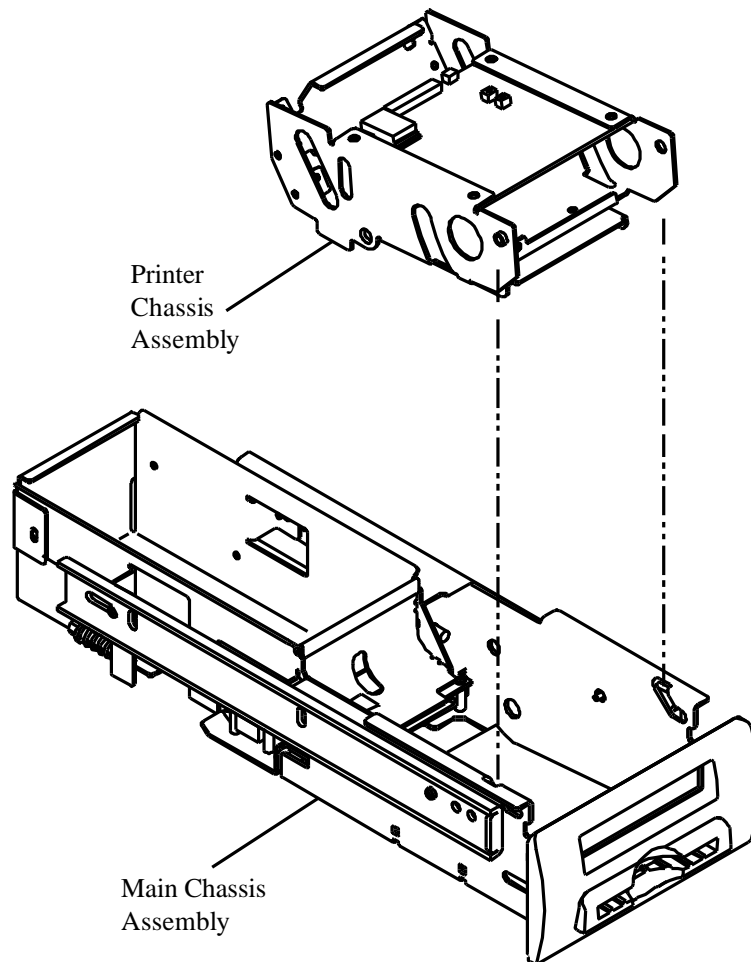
Separating the Printer Chassis Assembly from the Main Chassis Assembly
